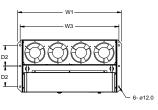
Floor mounting diagram for 380V 220–315kW models
